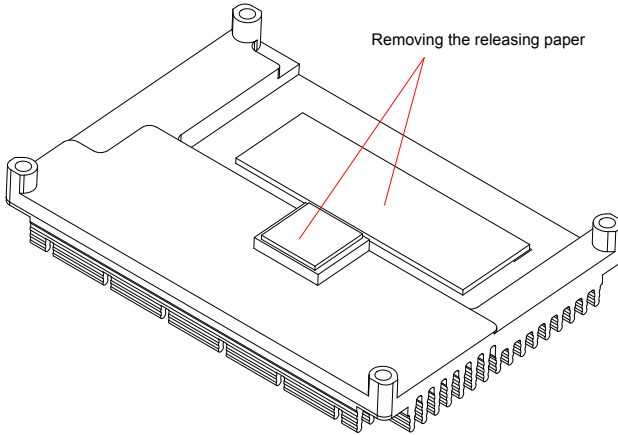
MIO-3260 Mechanical Drawing (Side View with Heatspreader)
